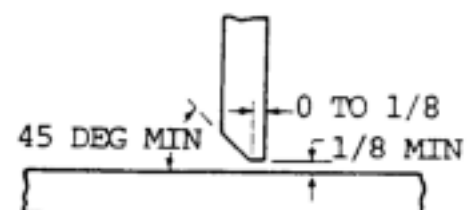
Tee joint - single pass fillet weld.
